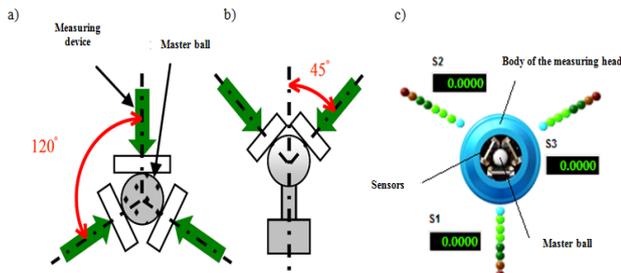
MT-Probe measuring head of R-Test system [13]: a) top view, b) end view, c) bottom view
